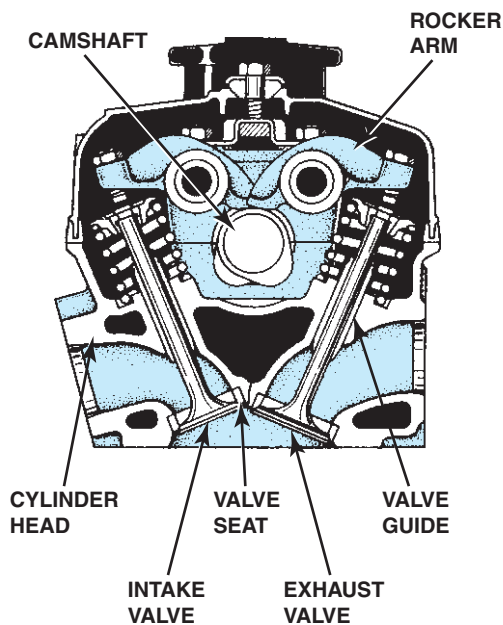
The seats and guides for the valves are in the cylinder head as well as the camshaft and the entire valve train if it is an overhead camshaft design.
